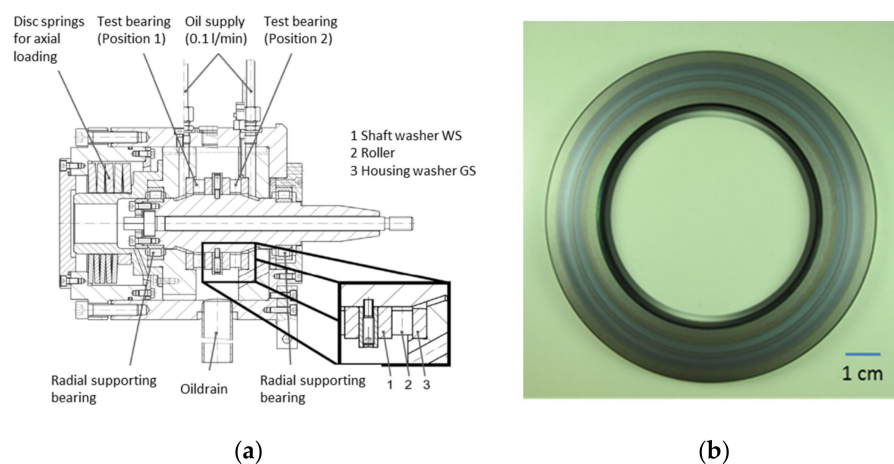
FE8 test rig for bearing life tests; (a) head of FE-8 test rig for characterization of rolling contact lubrication, (b) axial bearing washer with boundary layers after test.
